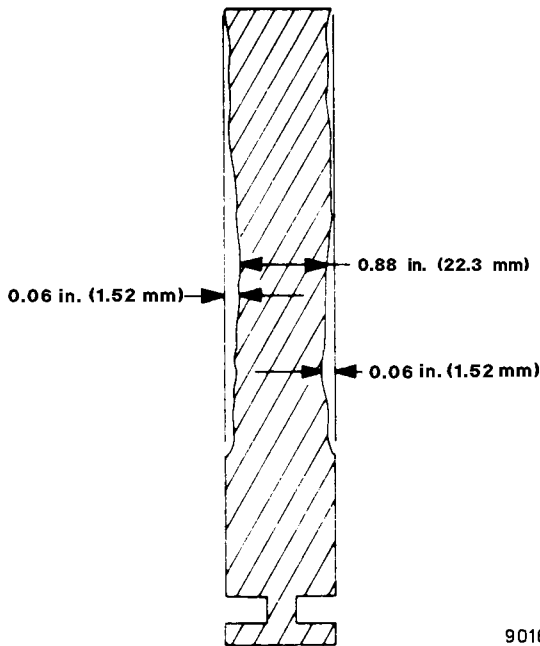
REAR BRAKE DISC WEAR LIMITS
